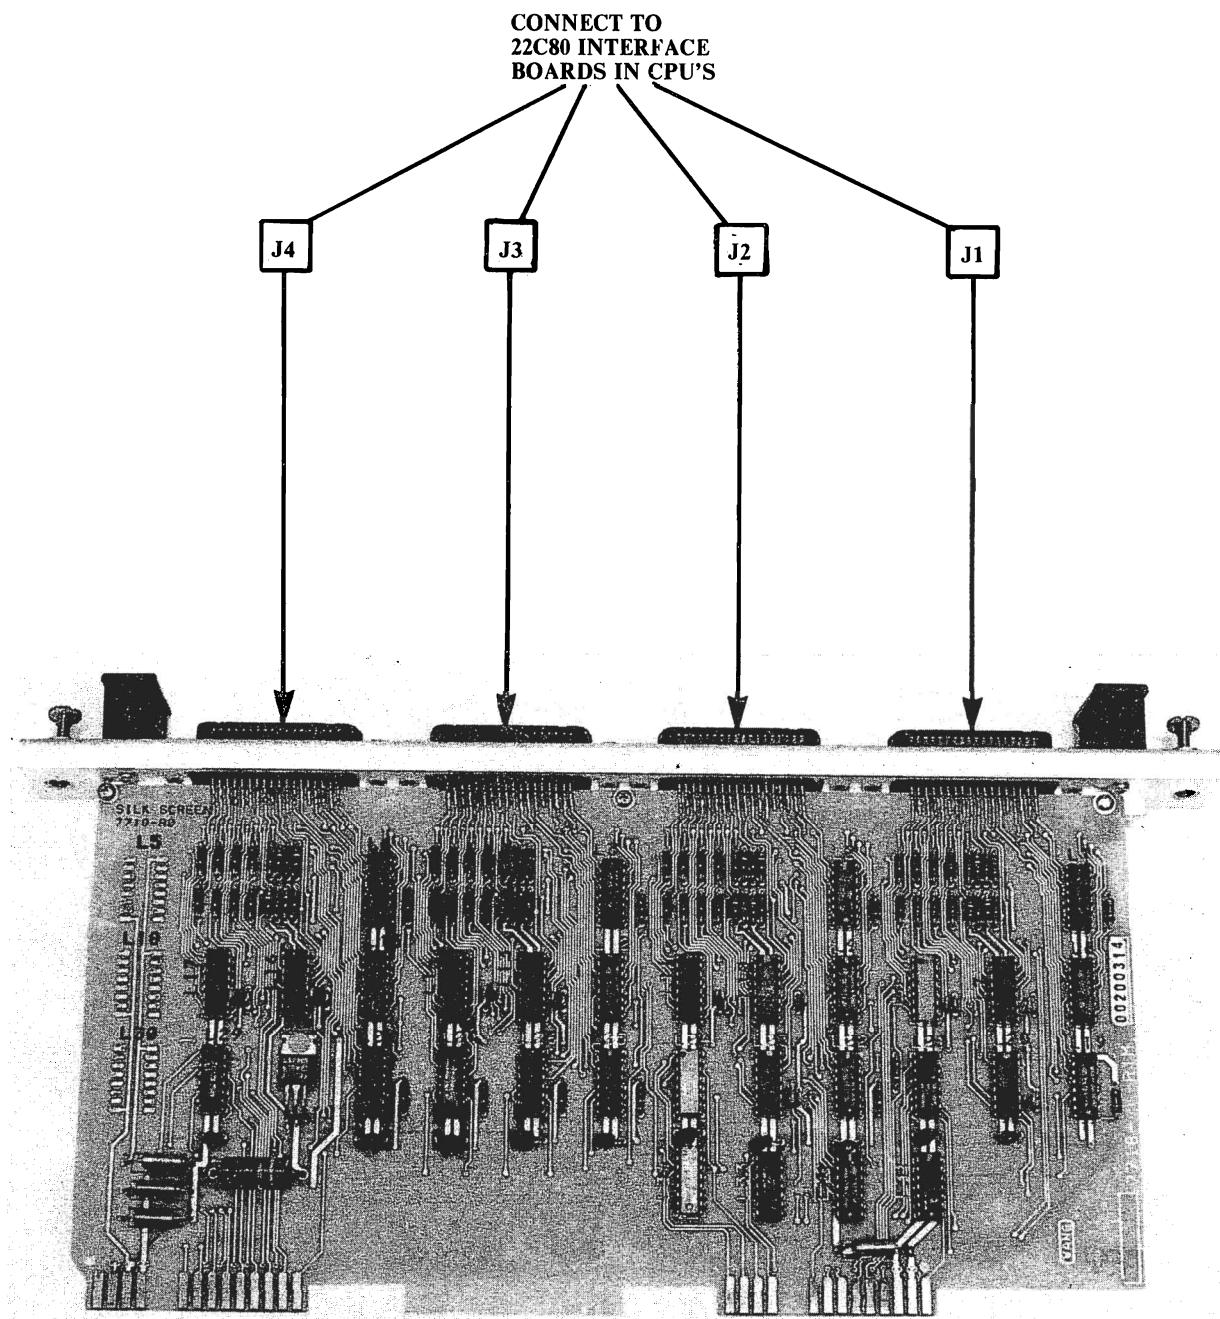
WL NO. 210-7718 PORT EXPANDER BOARD
